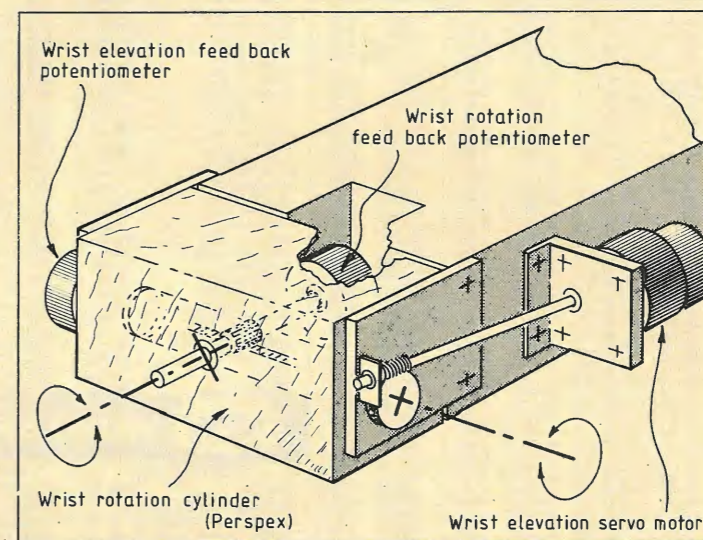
Wrist elevation is achieved using a d.c. servo motor with integral 75:1 gearbox. On its own, this produces insufficient torque to raise the gripper carrying its rated load, and additional gearing of 15:1 is incorporated together with a 90° direction change.
